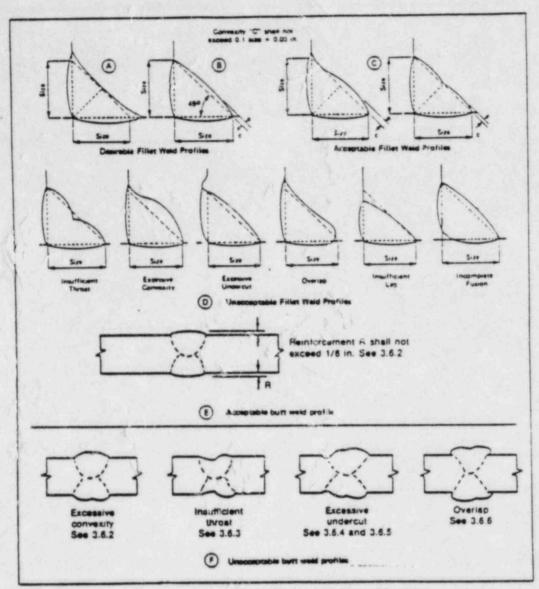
Fig. I -Acceptable and unacceptable weld profiles.
